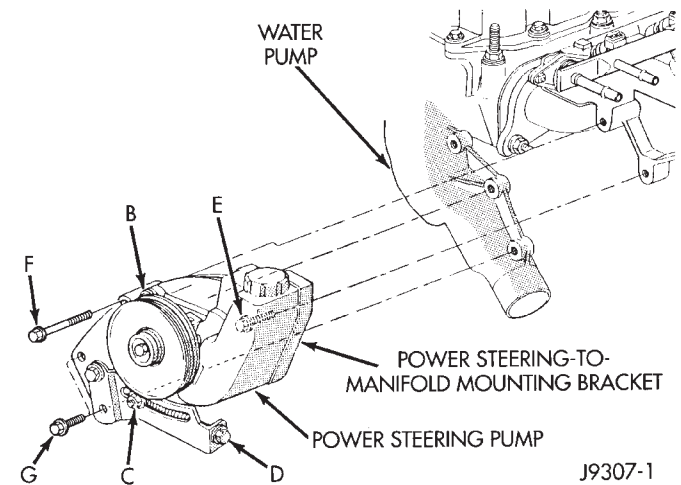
P.S. Pump Rear Mounting Bolts—4.0L Engine
